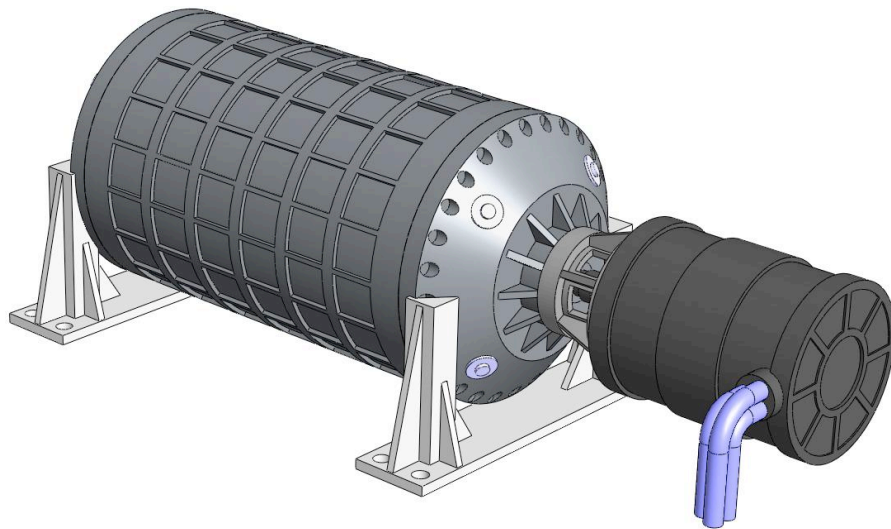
Integrated 210 MJ flywheel and 525 kW HIA motor generator package
